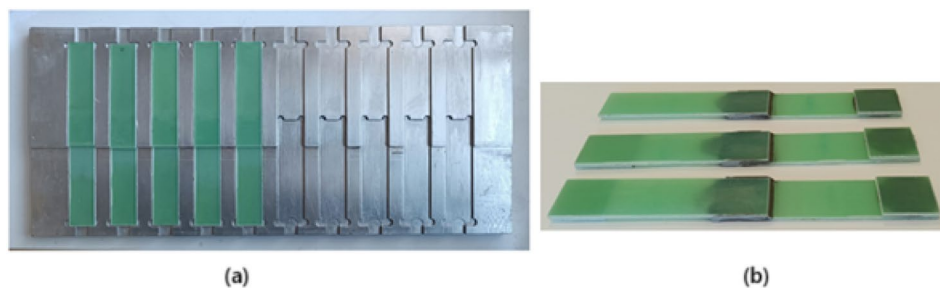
| (a) Aluminum mold, (b) fabricated samples.
